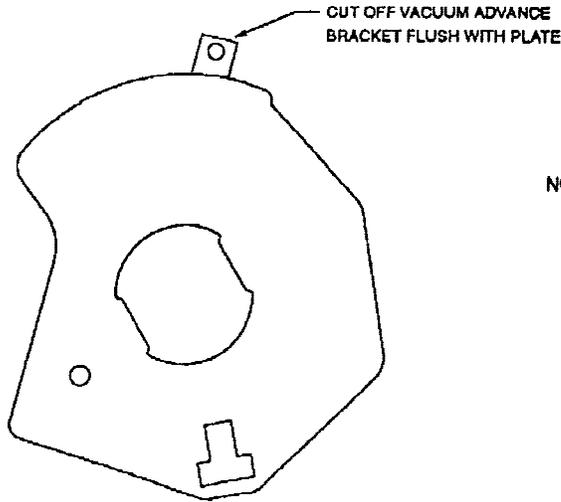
Modified Ford Distributor—Lower Plate Assembly
